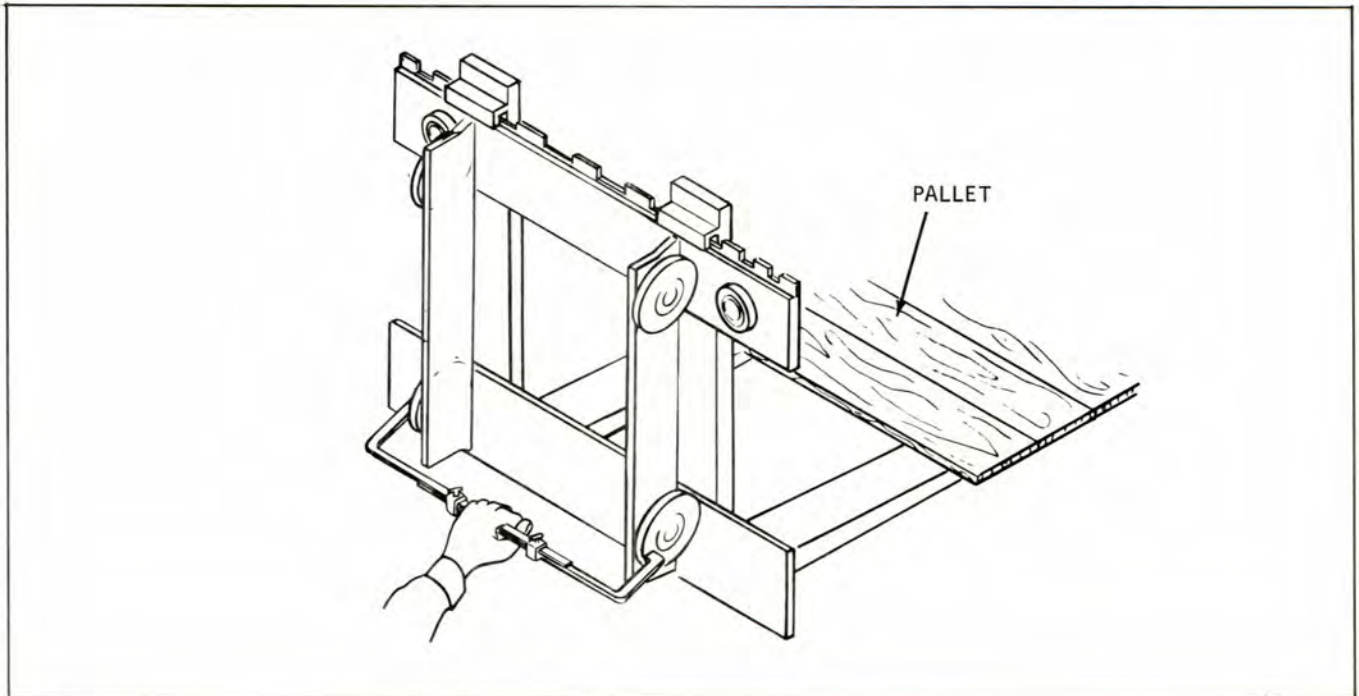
Spanning Lower Rollers (Four Roller Carriage)
